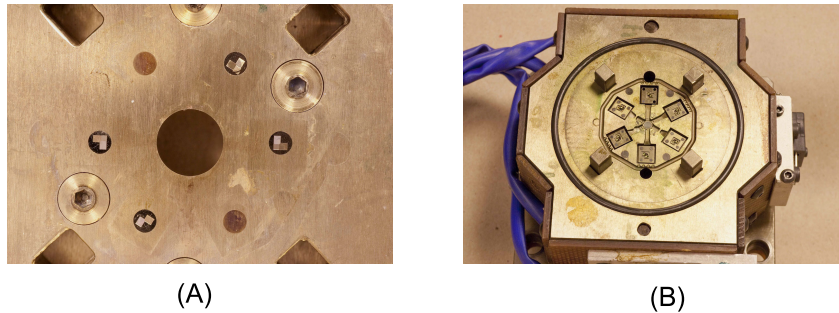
(A) Front master mould with inserts containing the micro-optical transmitter and receiver optics. (B) Backside master mould with macro-lens inserts.
